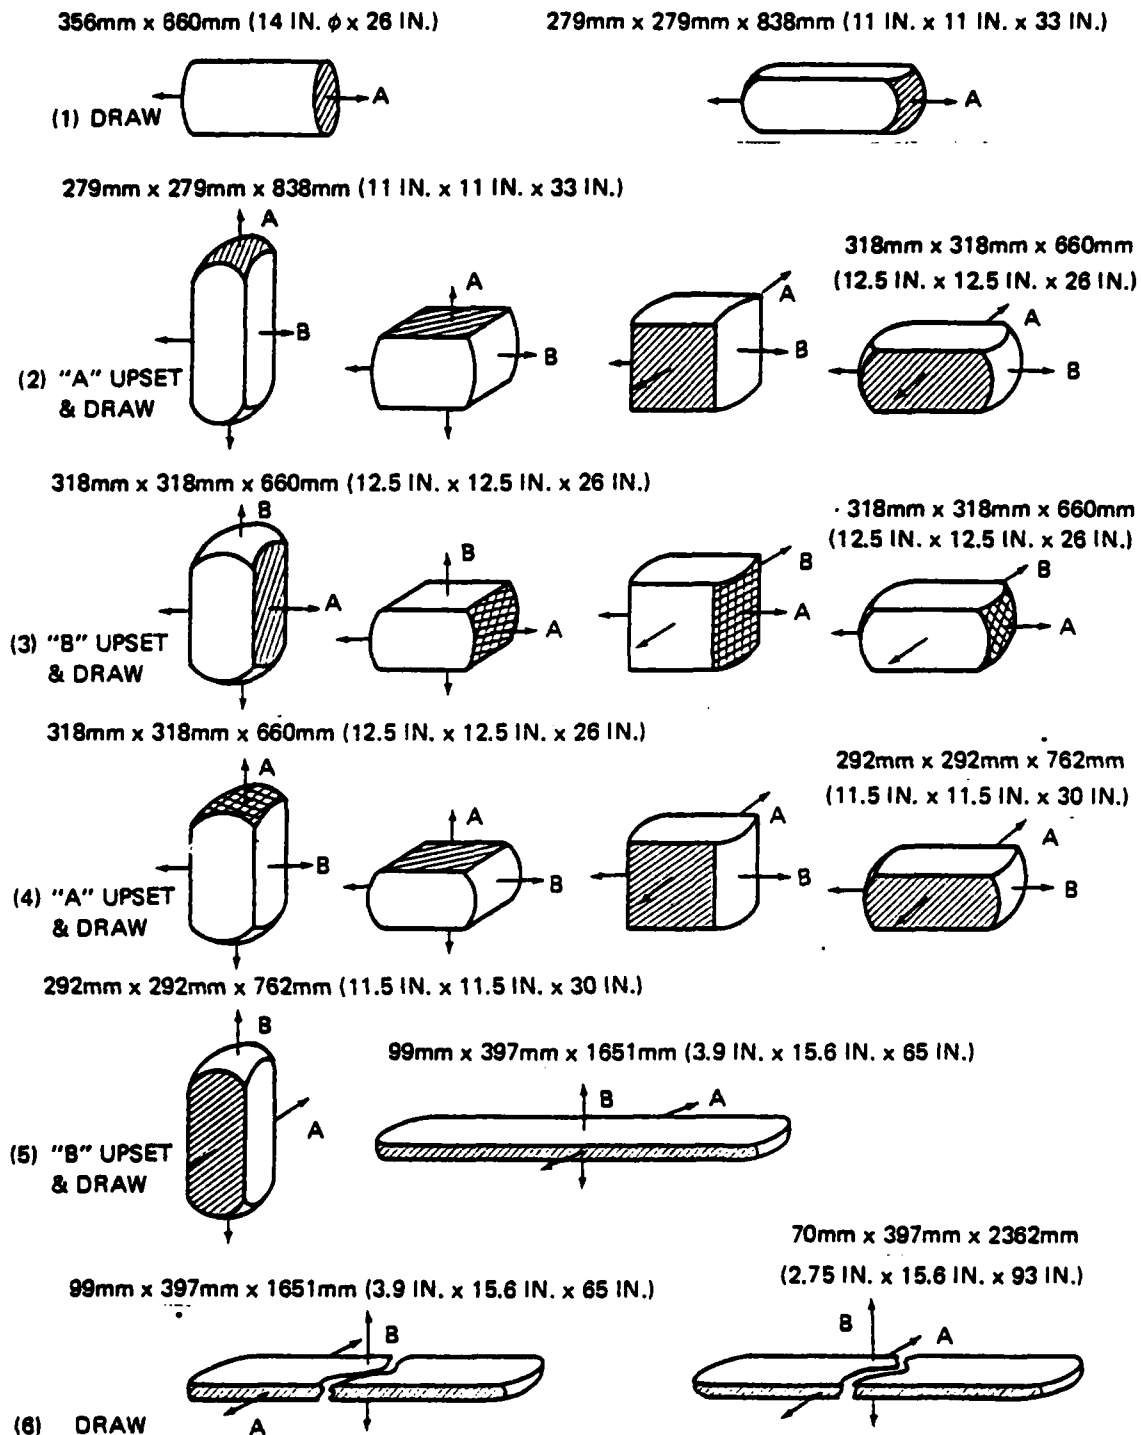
Forging Sequences Used to Produce 70mm x 397mm x 2362mm (2.75 IN. x 15.6 IN. x 93 IN.) 7149 and 7475 ITMT Hand Forgings
